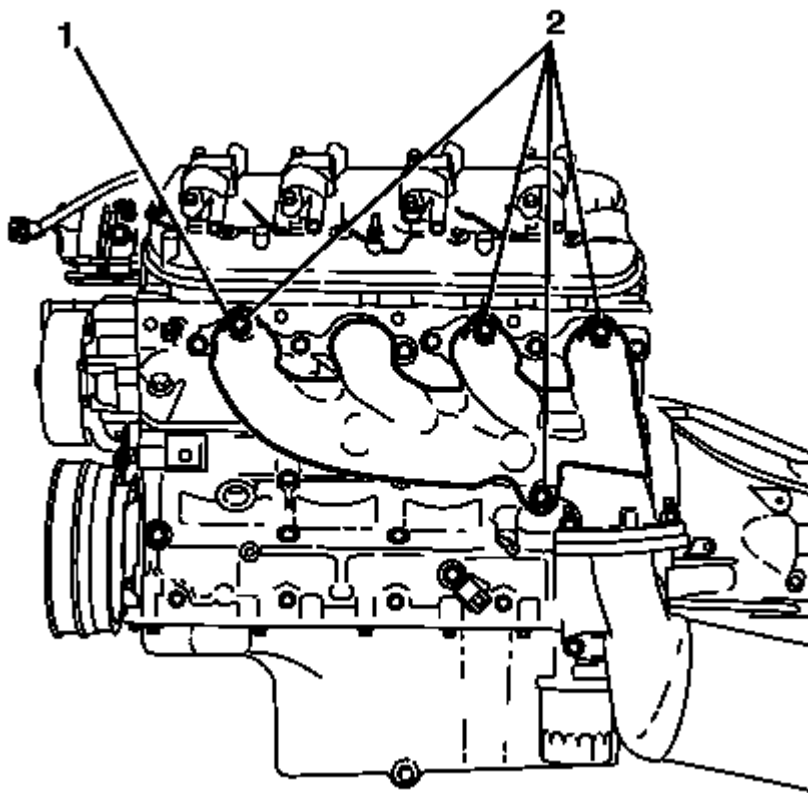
Identifying Left Side Exhaust Manifold Heat Shield To Left Side Exhaust Manifold Retaining Bolts
